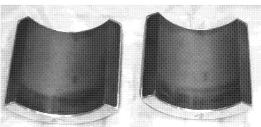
Undamaged surfaces of the rear bearing journal and pads
